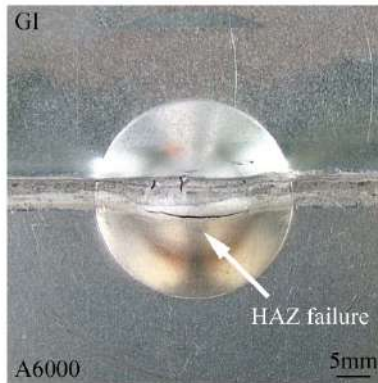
Erichsen cupping test specimen after testing of GI/A6000 joint
